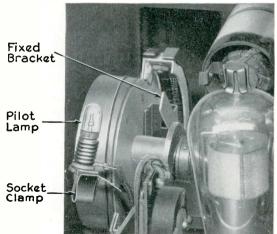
Pilot Lamp Mounting Showing Method of Installing Pilot Lamp— Socket Clamp Slides Over Fixed Bracket
